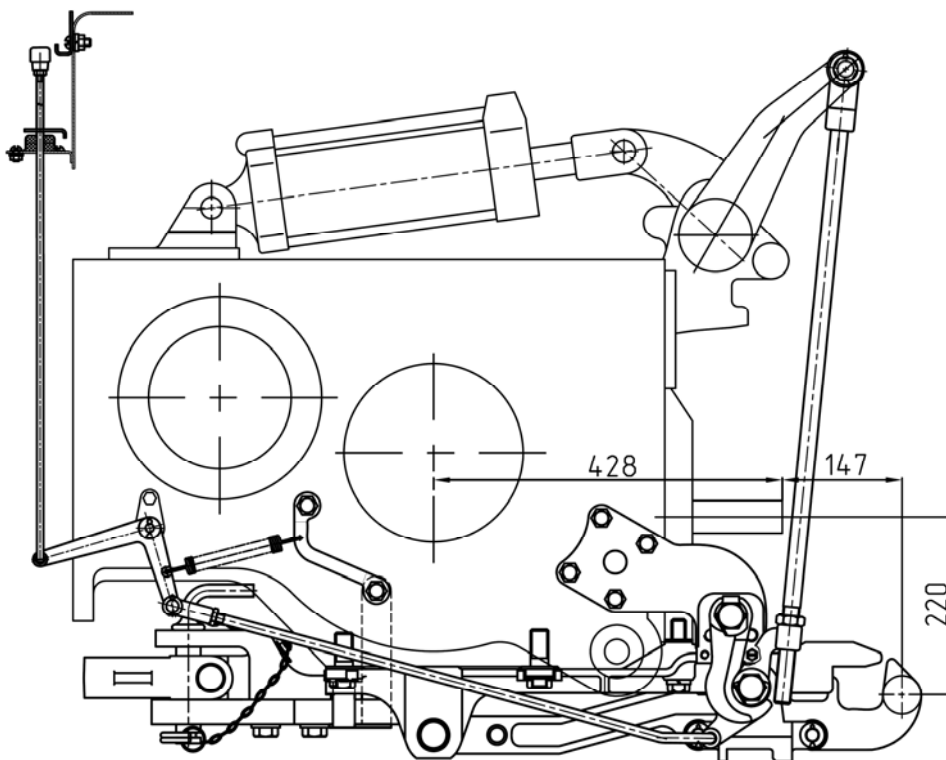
Installation scheme of DH-2 (hydraulic hook) and DH-2M-02 (combined drawbar with hydraulic hook in operation position)
